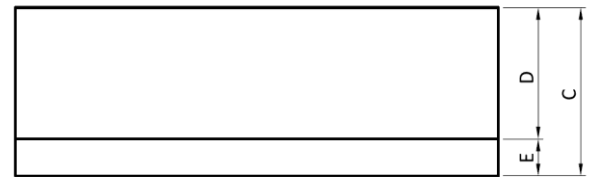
DMA 3.94 x 2.36 x 1.37 – 9-pin package dimensions (side view)
